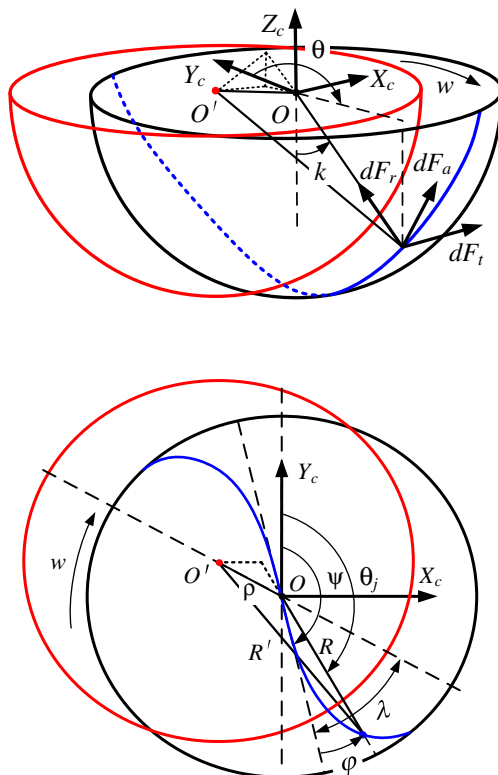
Geometry and force analysis of cutting edge on ball-end mill
